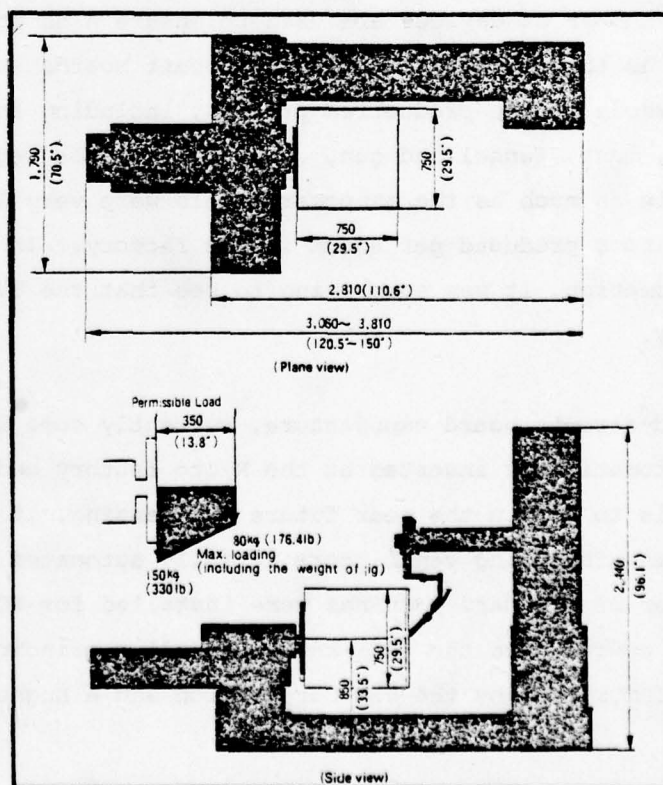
SHIN MEIWA ROBOT WELDER PW 750
